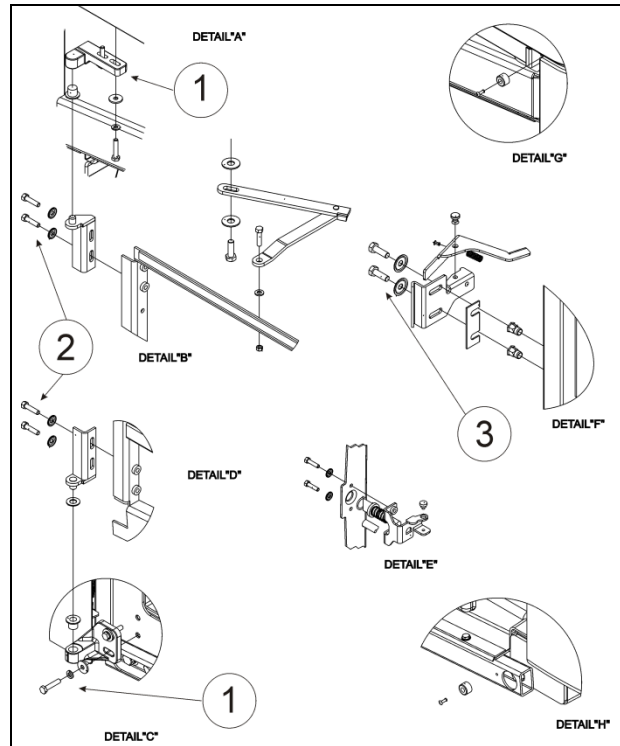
RADIATOR DOOR DETAILS 18636_2
